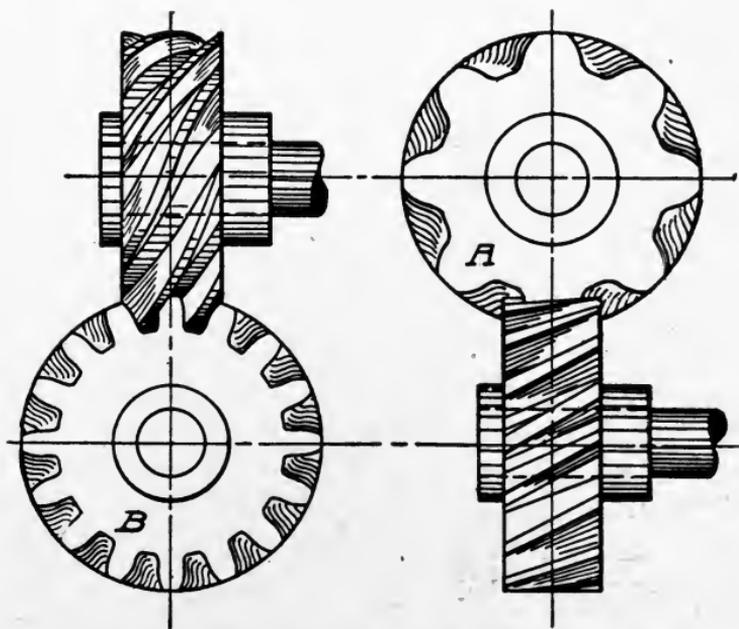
Spiral Gears Whose Shafts Are at Right Angles
